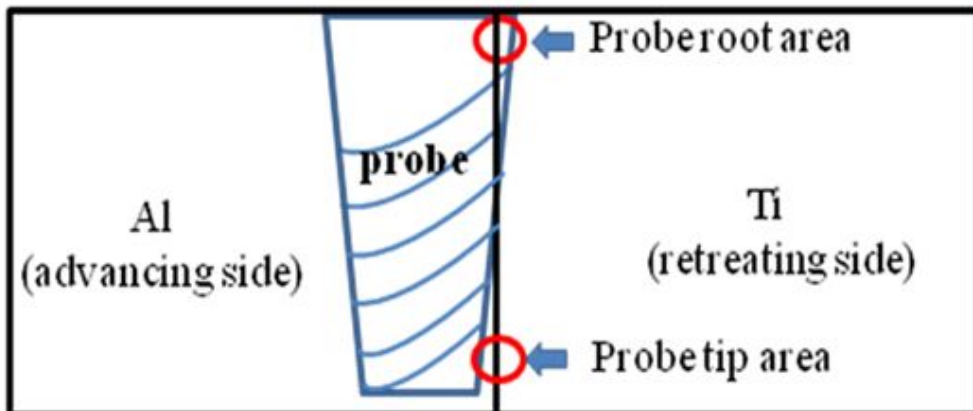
shows a schematic illustration of friction stir welding process between AA6061-T6 and Ti-6Al-4V. During FSW, advancing side is Al
